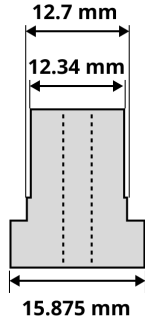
Dimensions of aluminum insert, from a side profile. The largest diameter of 15.875 mm is equal to the outer diameter of the carbon fiber tubes. The small lip of diameter 12.7 mm is an aligning feature the same size as the tube inner diameter, to ensure insert concentricity. The smallest diameter is the inner diameter of the carbon fiber tube minus the specified bond gap of .178 mm.
